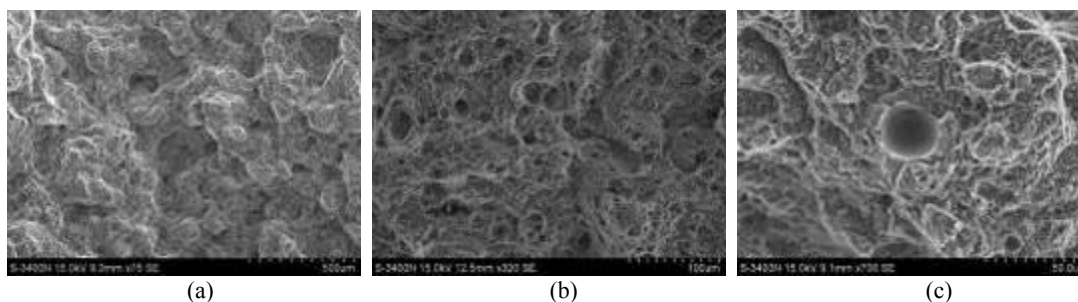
Fracture characteristics of Al-Mg-Sc-Zr alloy tensile test pieces: (a) Macro overall topography, (b) Cleavage plane and dimples, (c) Spherical pore defects
